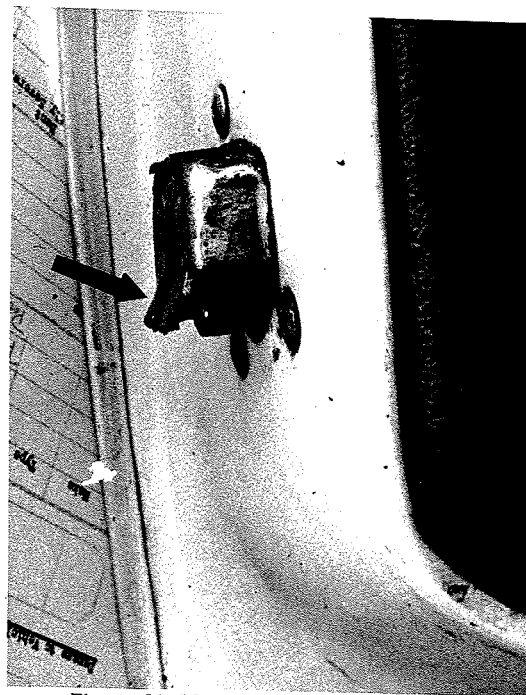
Damaged door latch on a 1957 FE Holden. Arrow indicates bent flange. This latch superseded the one shown in Figure 12.8.
